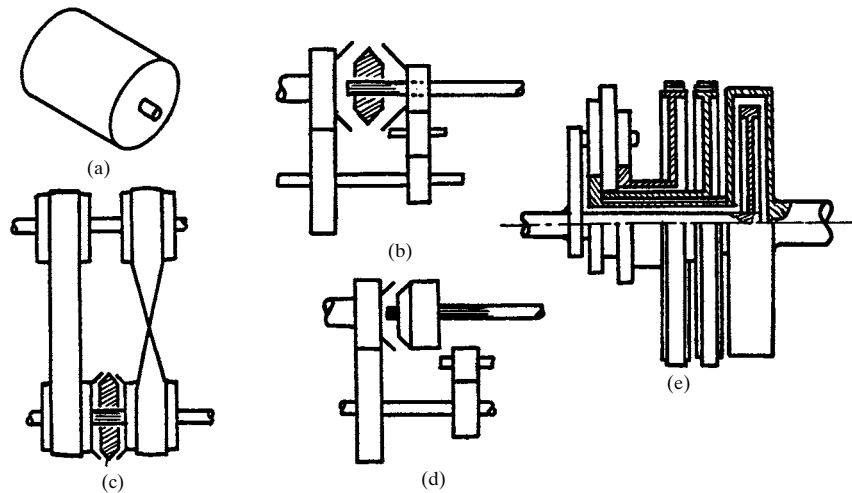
Reversing mechanism. These mechanical devices change the direction of rotation of the output. (a) Reversible prime movers; (b) reversing gears; (c) reversing belts; (d) transmission; (e) epicyclic gears as in Model T Ford.
